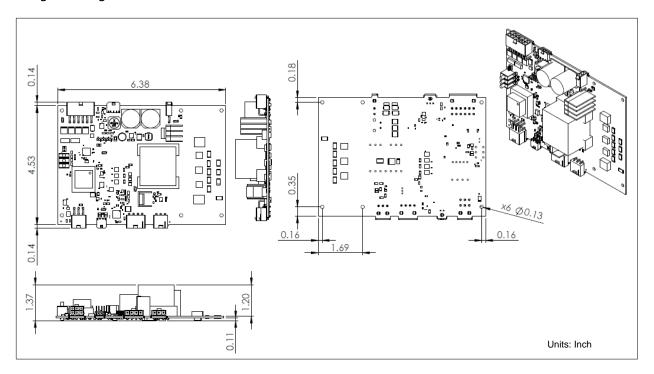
Power Interface Model C/D PCB Mechanical Drawing
